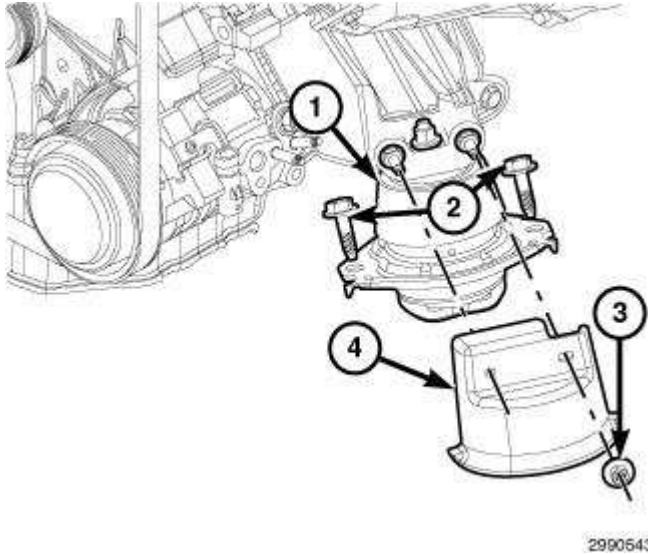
Engine Mount Heat Shield Retaining Nuts, Lower Mount Retaining Bolts & Heat Shields
